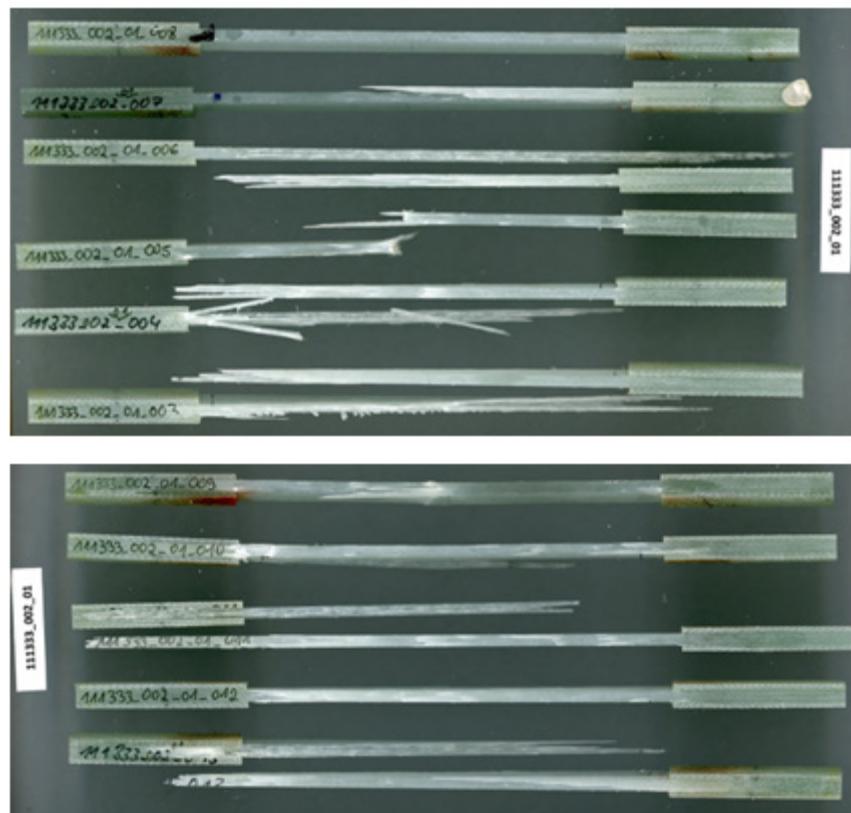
Front side UD5° failure mode fatigue test R=0.1
